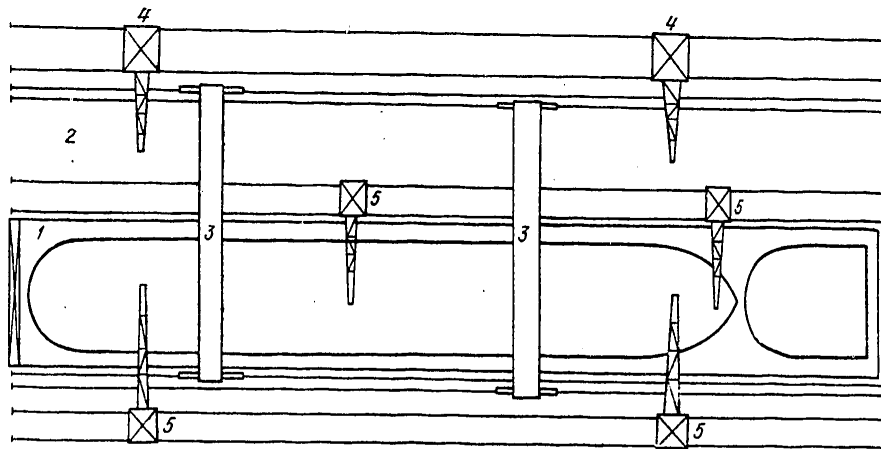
Layout of the crane equipment of a shipbuilding drydock for building large tankers by the modular-sectional method with a side platform for consolidation of the sections and unitized units. 1 -- shipbuilding drydock; 2 -- side platform for consolidation of sections and unitized units; 3 -- gantry crane; 4 -- 250-ton portal crane; 5 -- 80-ton portal crane
